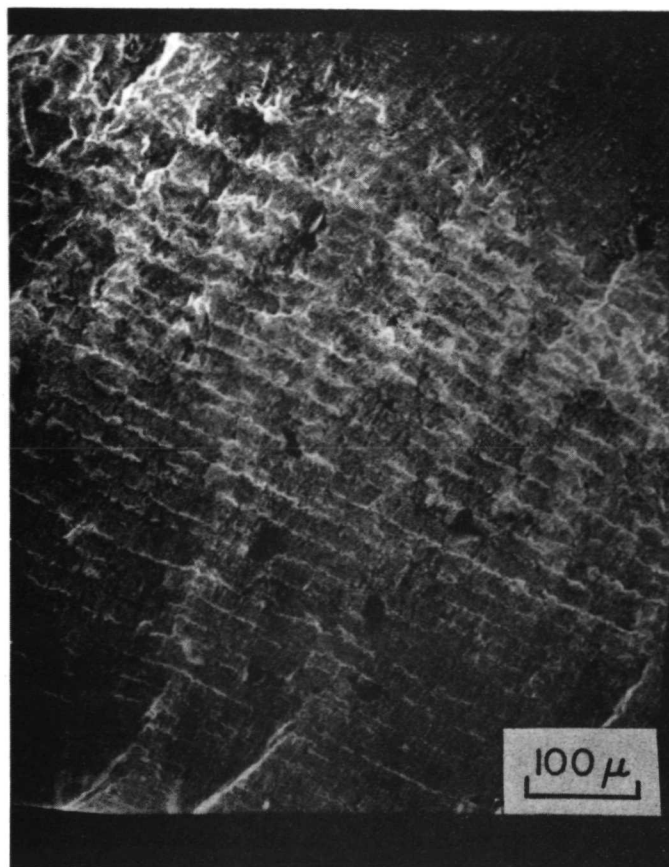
(b). The fracture surface of Specimen 53 showing crack front striations. Note the shallow relief and sharp definition characteristic of brittle fracture.
